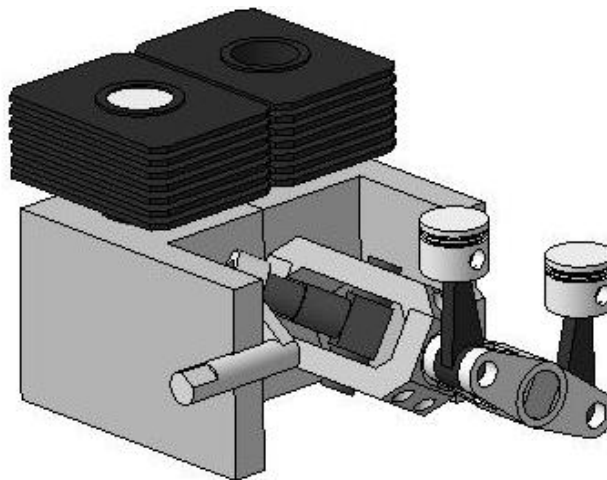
The design of the engine with a spatial hinge and tilting shaft
